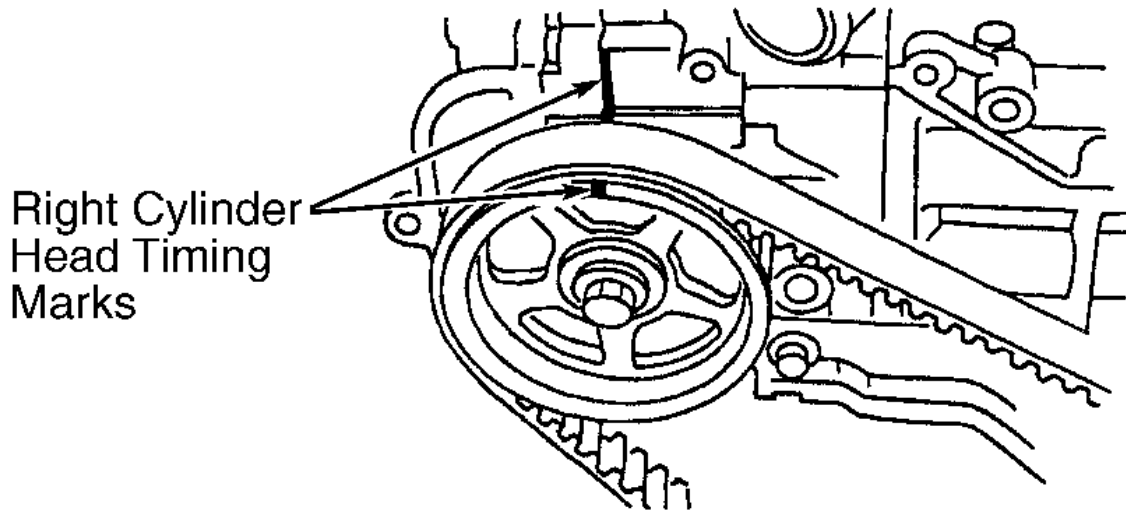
Aligning Camshaft & Crankshaft Timing Marks
